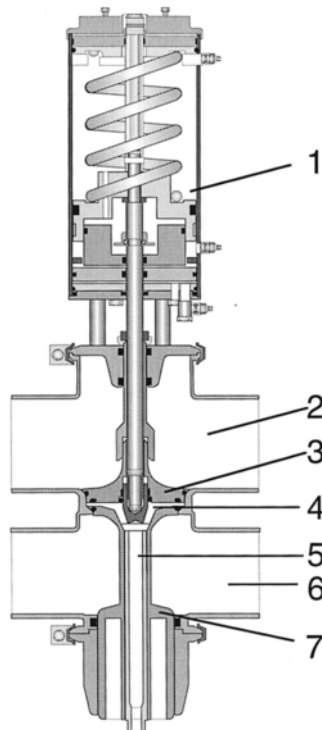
Detailed illustration showing the assembly of a double-seat mixproof valve with balanced plug and built-in seat lift
